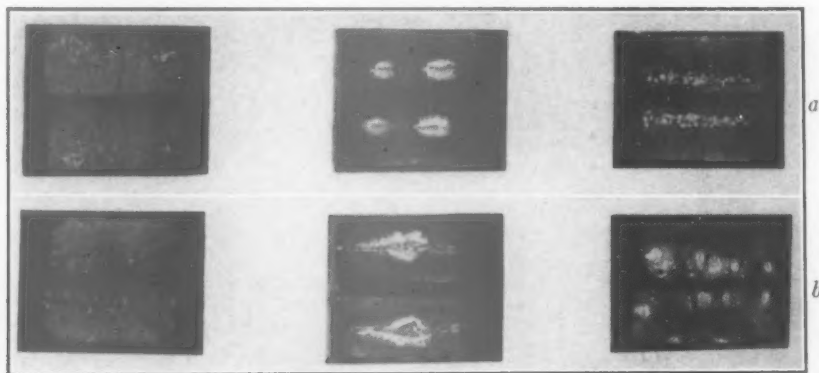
TENSILE FRACTURES THROUGH WELD METAL SHOWING THREE TYPES OF HYDROGEN EMBRITTLEMENT.
